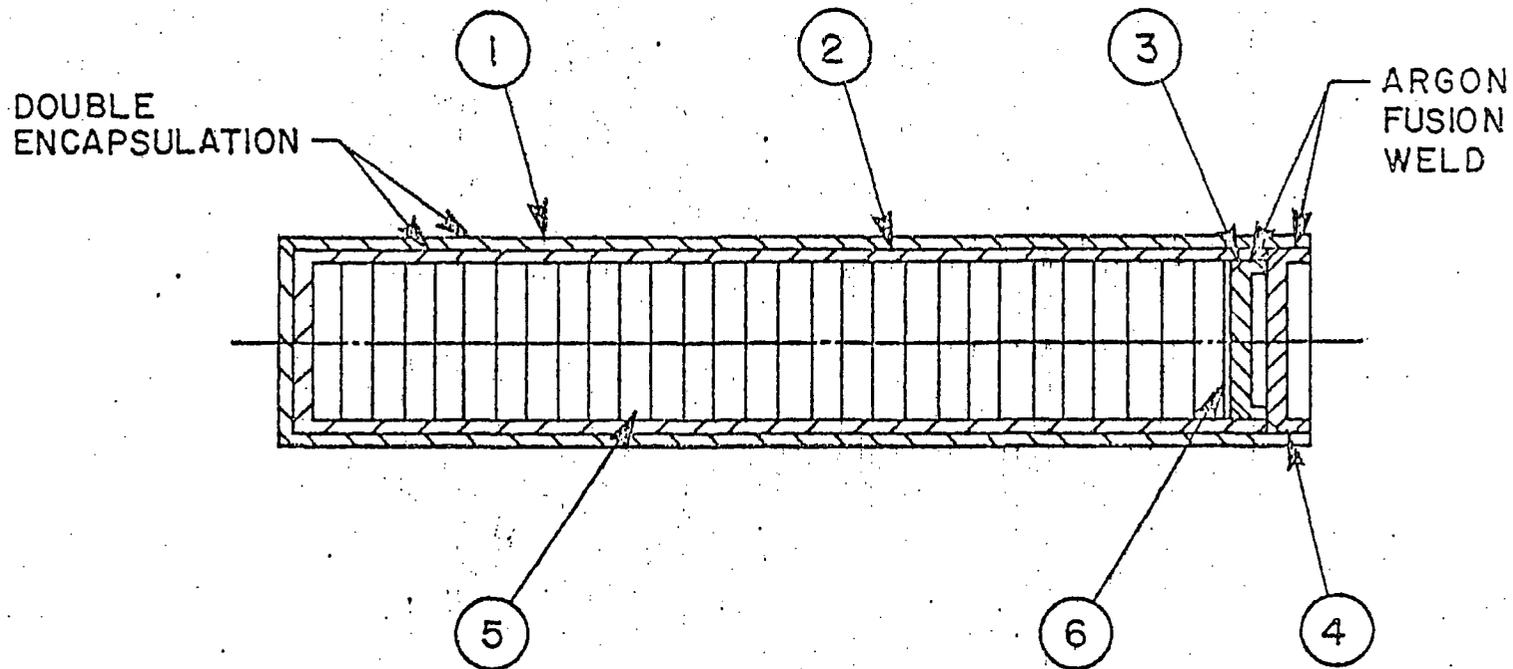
CAPSULE & RISE TUBE ASSEMBLY
